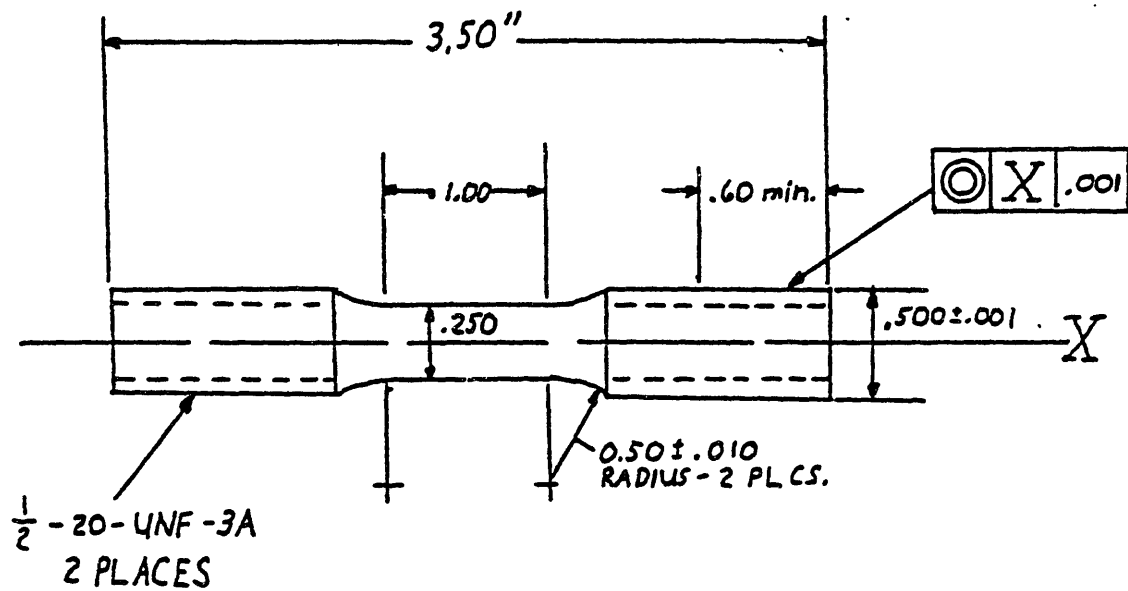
Smooth bar creep-rupture and tensile specimen geometry. (Dimensions in inches)
